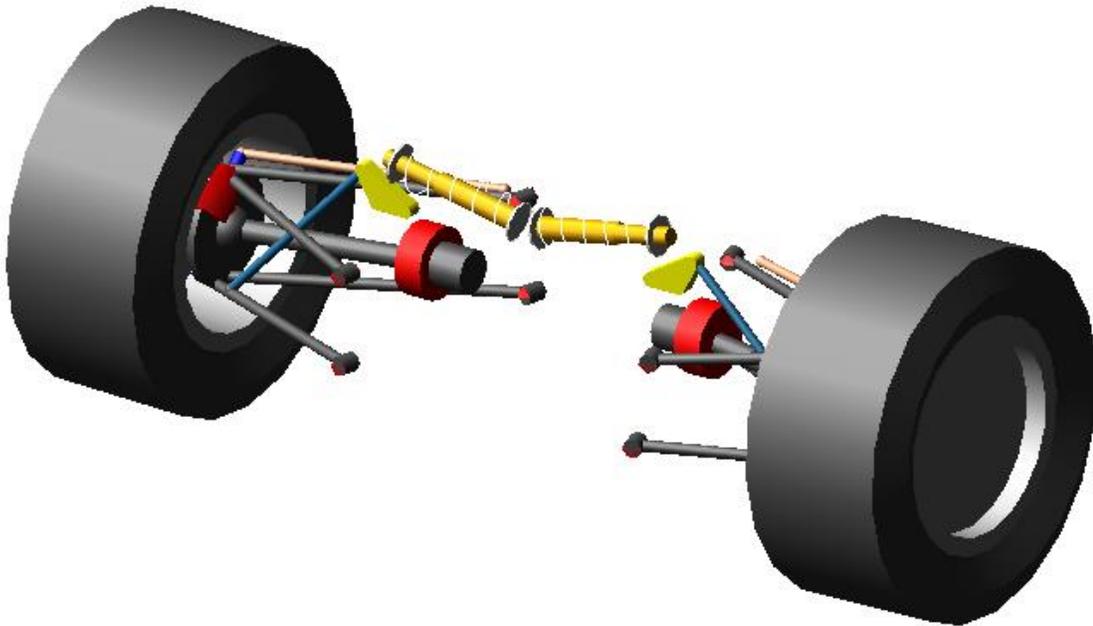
Rear Suspension Assembly, complete with powertrain and brakes.
